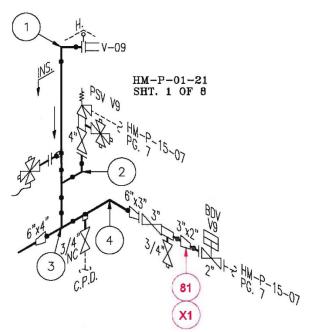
A partial view of isometric drawing HM-P-01-21, sheet 1 of 8. The location of profile radiography (X1) is shown in red.
